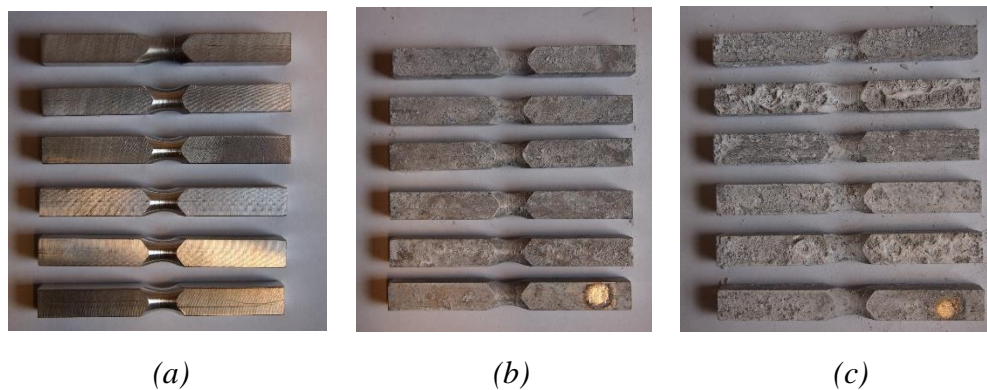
Three types of fatigue specimen, (a) free corrosion specimens, (b),(c) corrosive specimens after two and four days in corrosion process, respectively.
